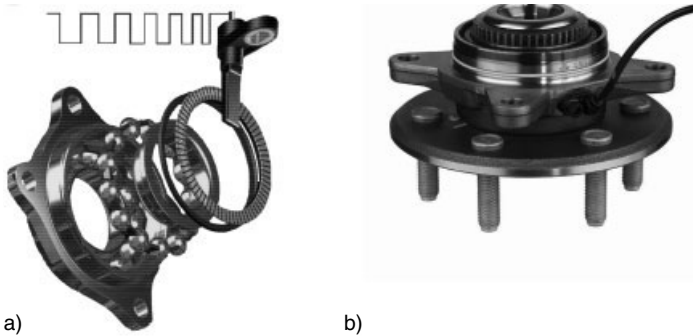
a) Wheel bearing with integrated multiple tone wheel; b) wheel-speed sensor with in-bearing application (tone wheel not visible)
